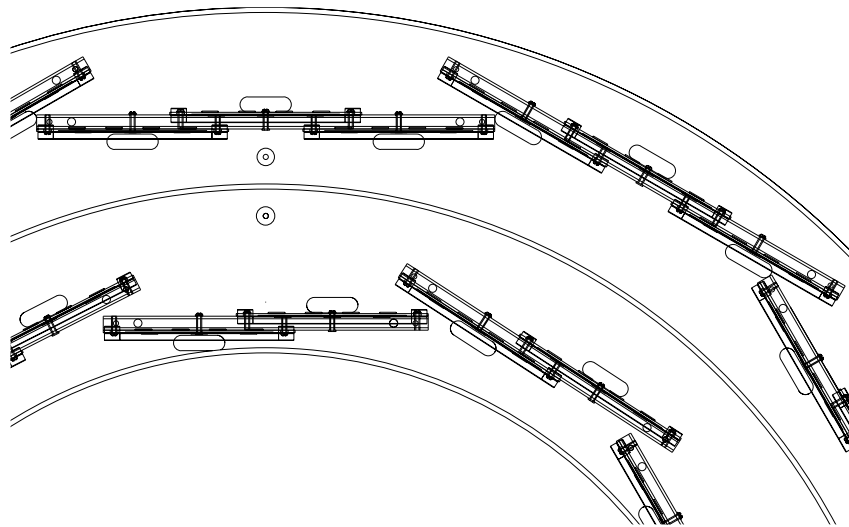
Closeup of one section of the end view of an endplug barrel.
